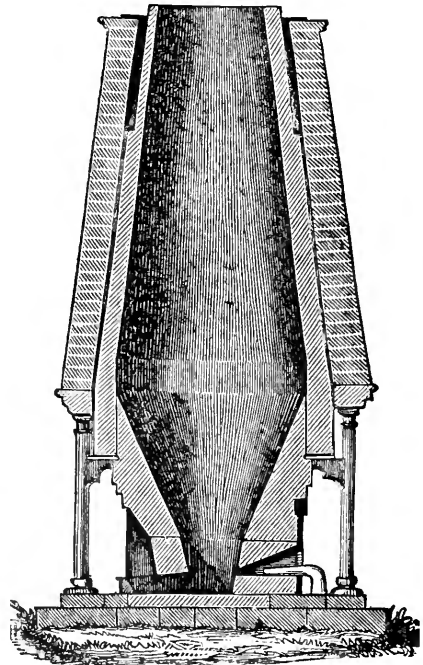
SECTION OF FRENCH COKE BLAST-FURNACE.
